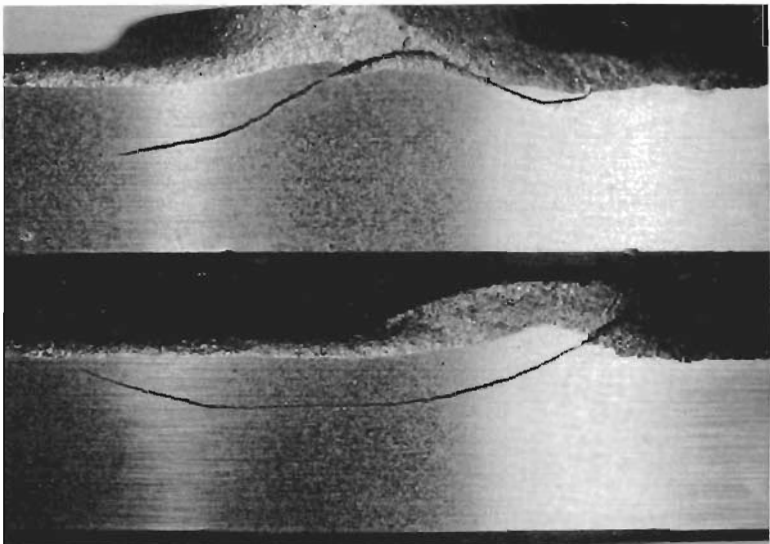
Steel-forged gear carriers, 3/4×. Macroetched on the machined surfaces to show the extent of forging laps.
